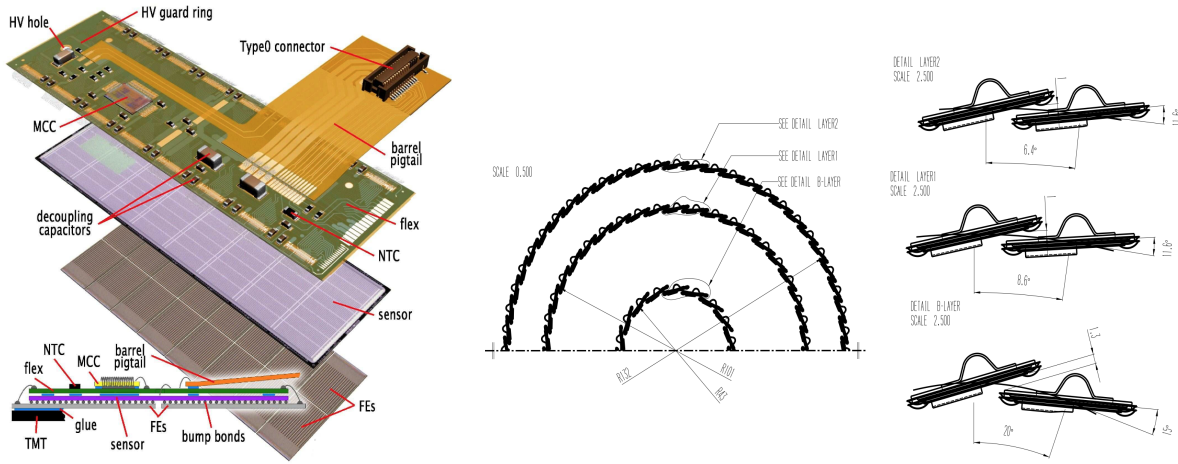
Schematic view of a barrel pixel module illustrating the constitutive elements and a plan view of the module layout [135]. (Right) Schematic view of the barrel cross-section showing the arrangement of barrel staves in three layers [147].
